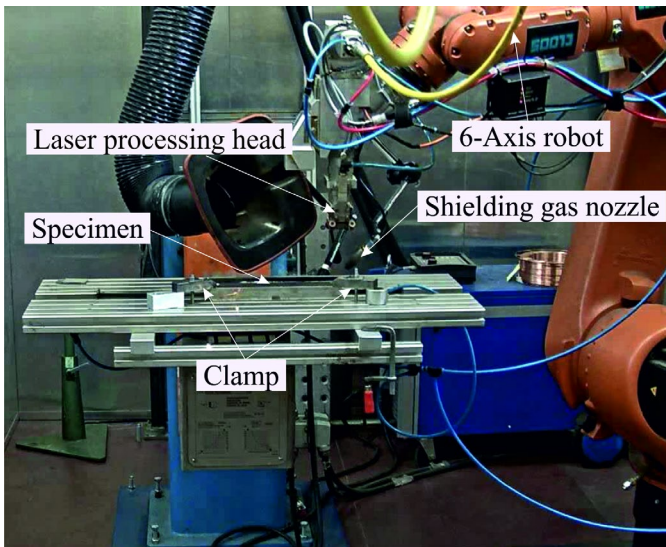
Experimental setup for the laser welding of the double-sided joints
